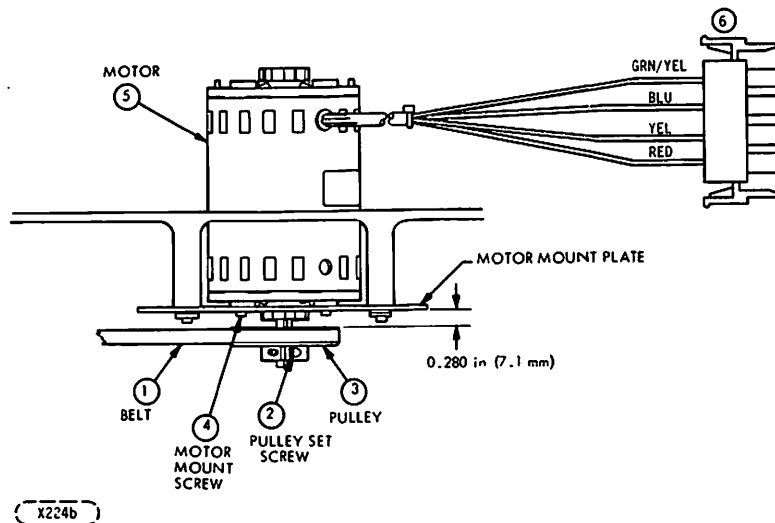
DRIVE MOTOR ASSEMBLY
